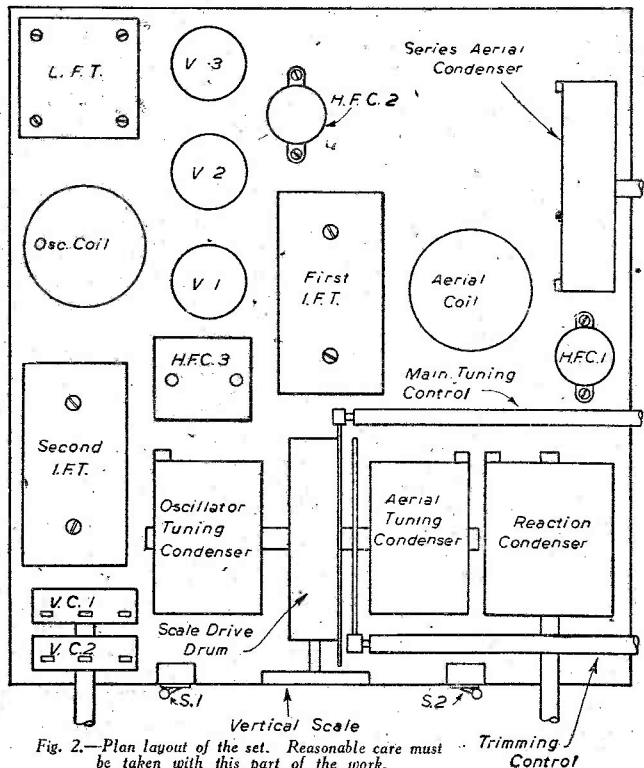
Plan layout of the set. Reasonable care must be taken with this part of the work.
